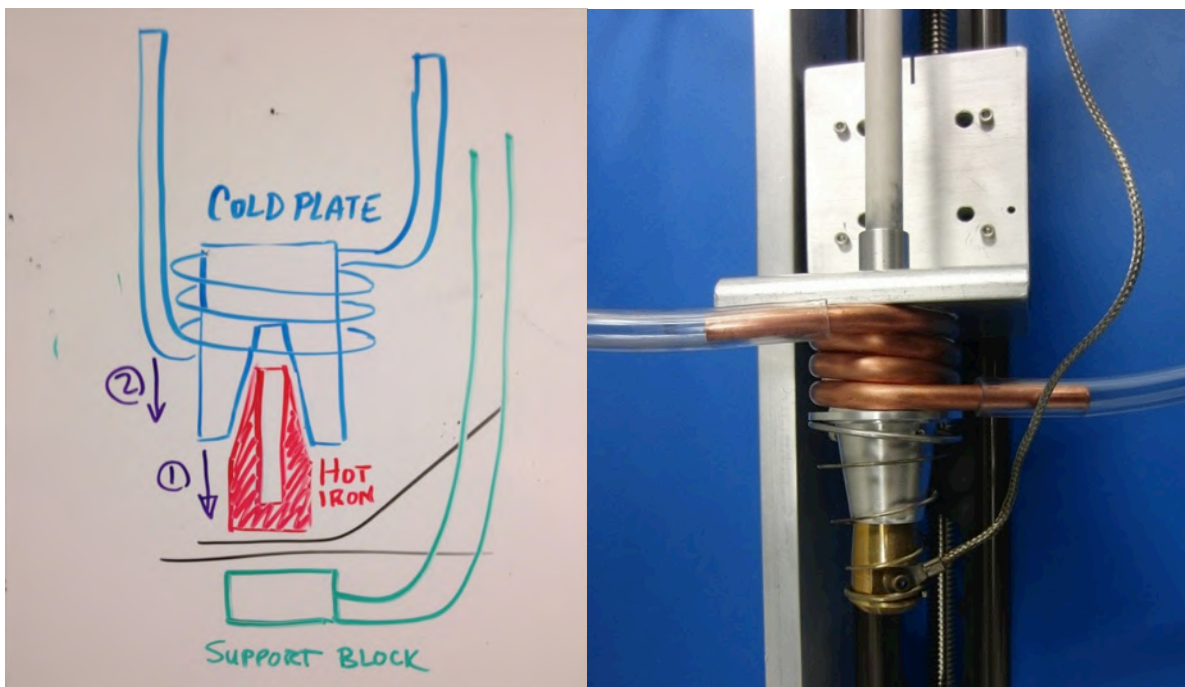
Hot / Cold Welder Concept (left) and Prototype (right). *This contact welder heats the material to the melting point, shuts off the heater, applies the cold block to draw away heat, and retracts from the joint with little to no adhesion of matrix on the welder head.
